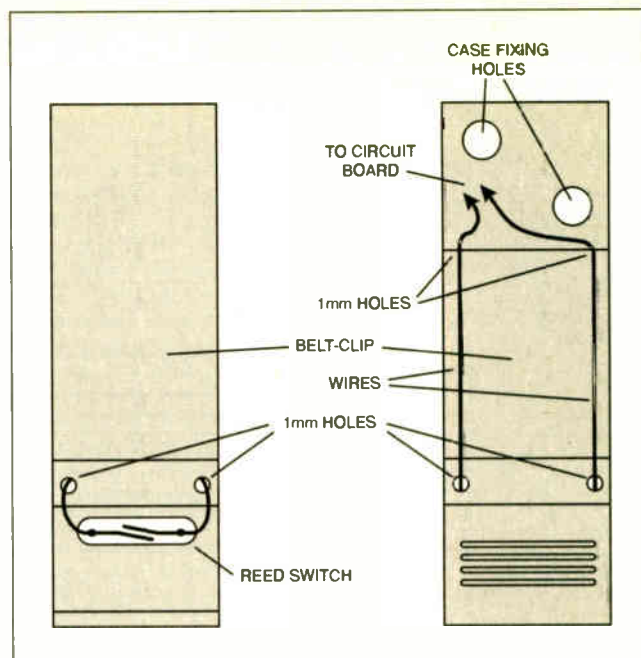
One suggested method of mounting and wiring the magnet-operated reed switch on the case belt-clip.
